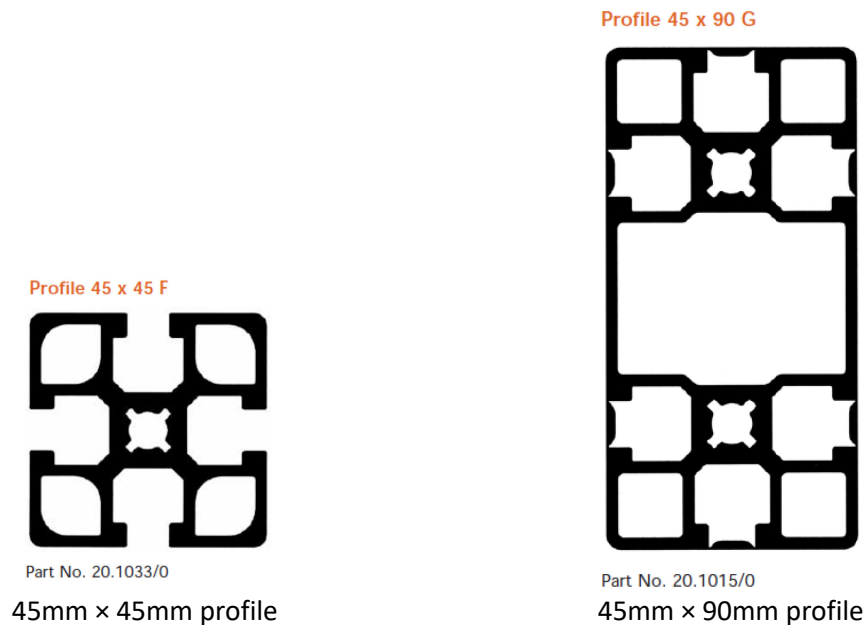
Aluminum extrusion profiles used. (Movetec Profiles)
